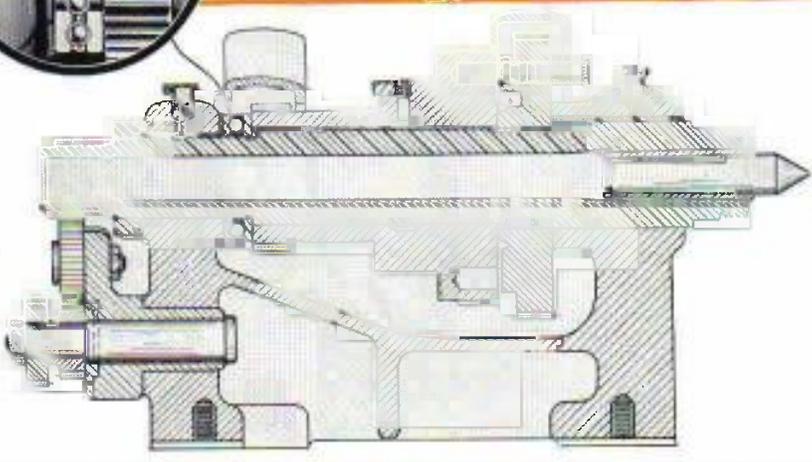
Cross Section Drawing of 9-inch "Workshop" Lathe Headstock
